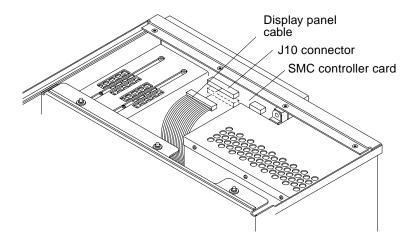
Disconnecting or Connecting the Display Panel Cable
